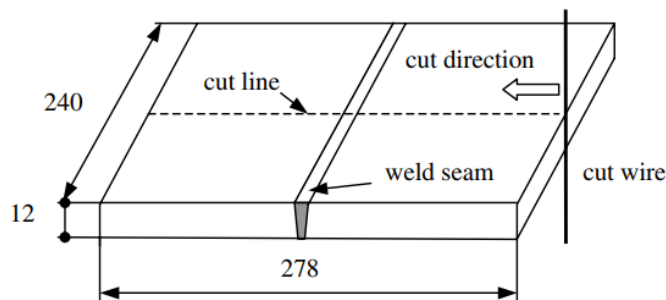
19: Schematic illustration of the aluminium alloy butt-welded plate joined by a VPPA welding technique and cut arrangement for the contour method [59].
